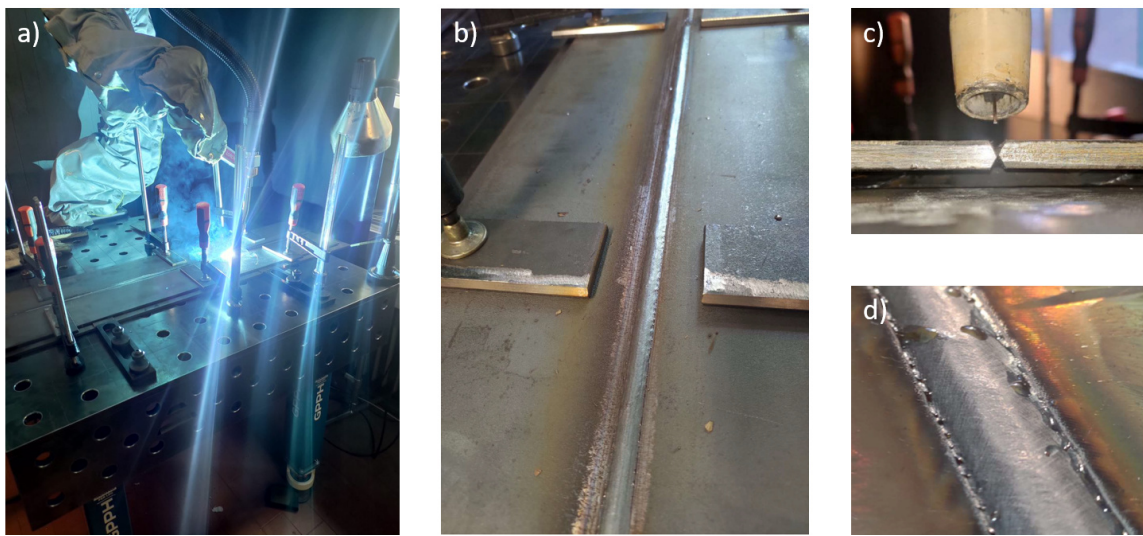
Images from the welding process; a) Lorch Cobot welding robot in action; b) finished weld; c) double V-groove before tacking; d) fine scaled weld face
